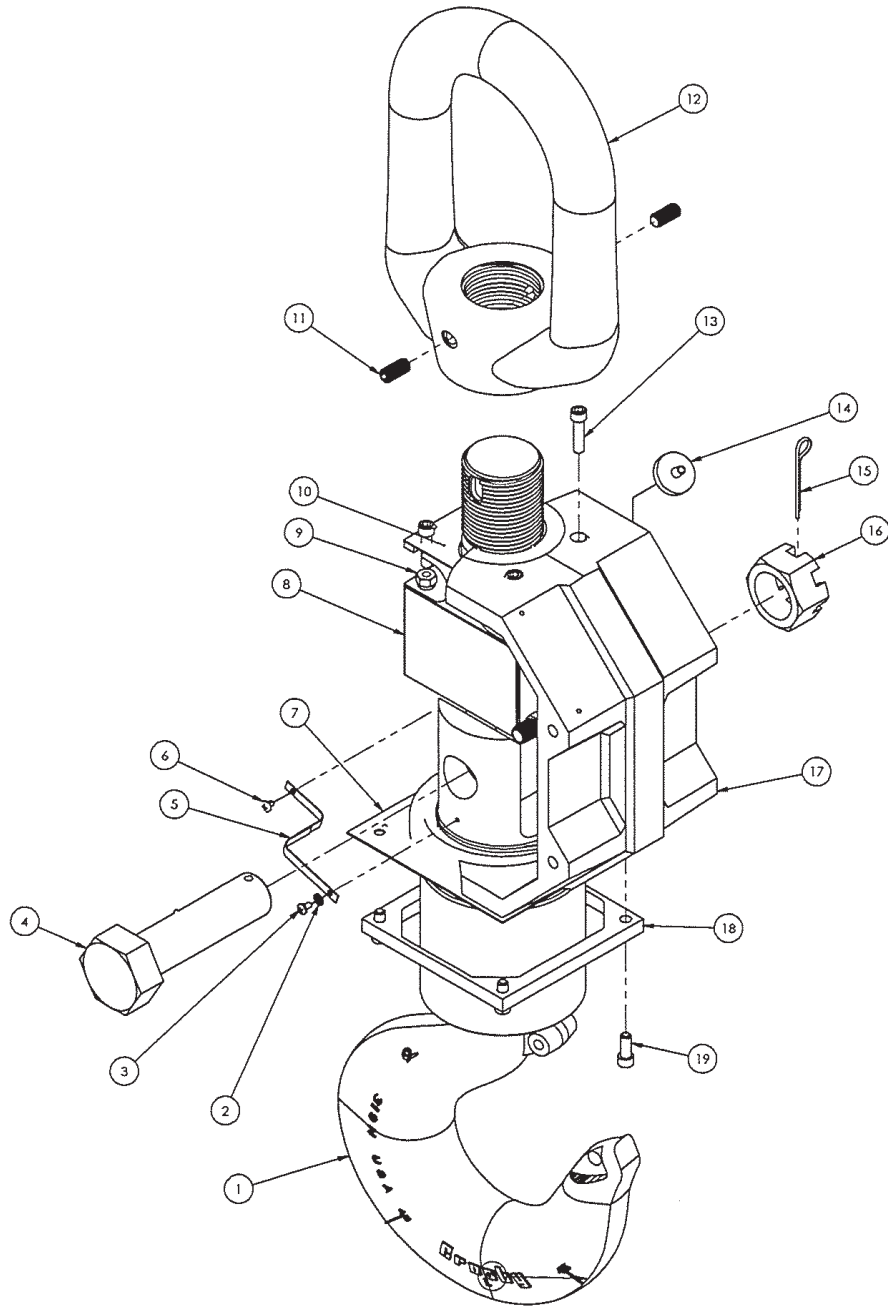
MSI-6360 Mid-Section Assembly 20,000 lb and 30,000 lb
